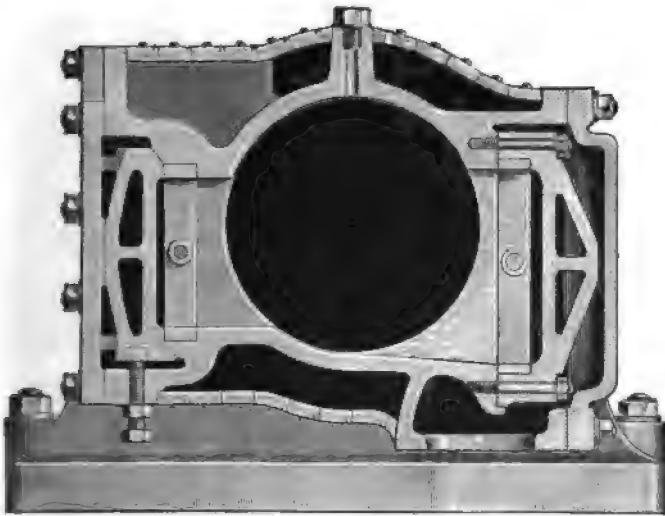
PORTER'S ENGINE-CYLINDER.
